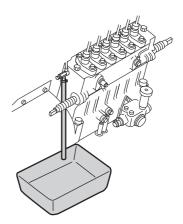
Fuel Injection Pump - Bleed Air 2
